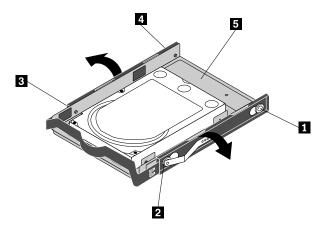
Installing a 2.5-inch hard disk drive into the bracket
